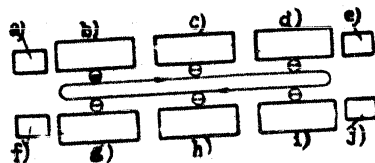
Arrangement of Six Machine Tools to be Used Simultaneously by a Single Operator
